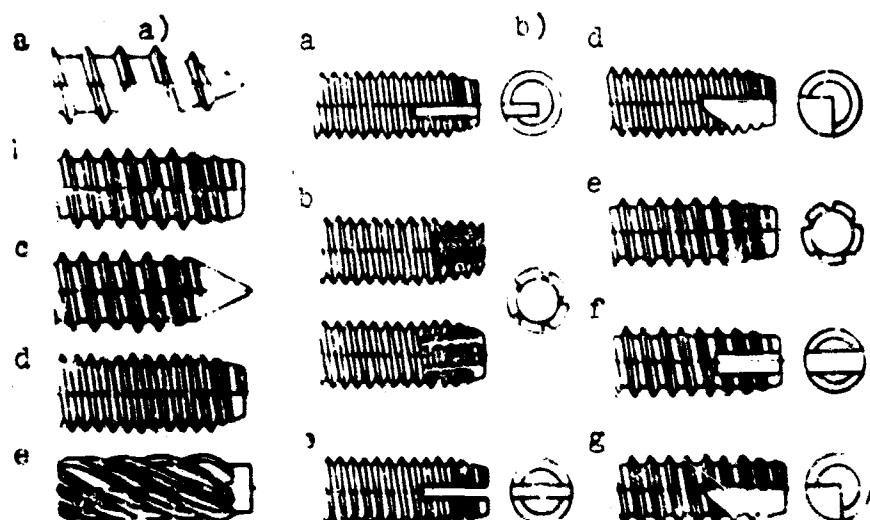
Self-tapping screws of American production: a) for thread rolling; b) for thread cutting.
